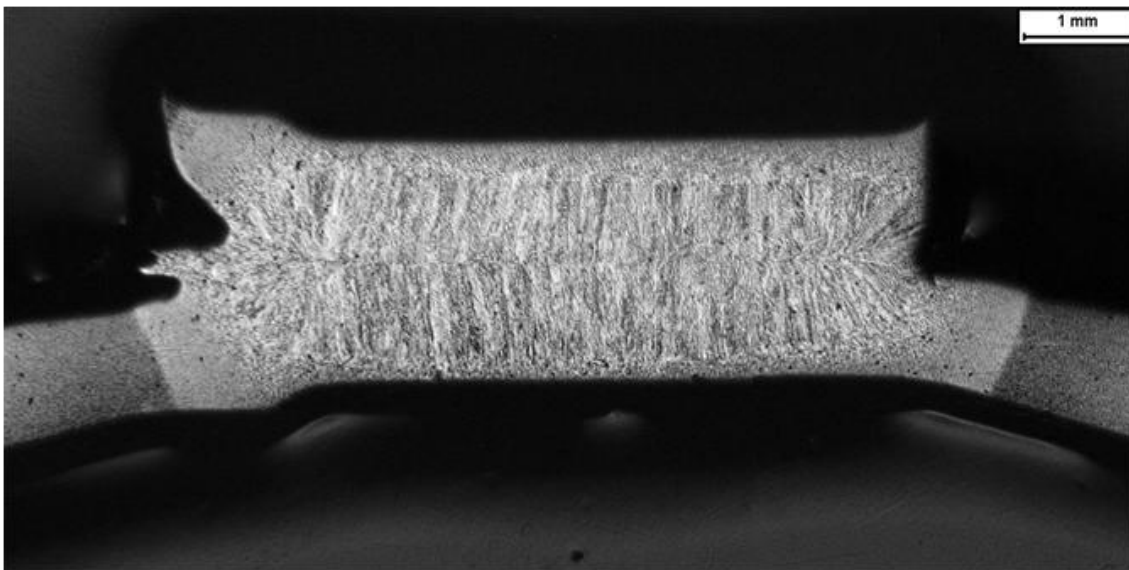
a: Plug failure in tensile tested DP800 resistance spot weld.
